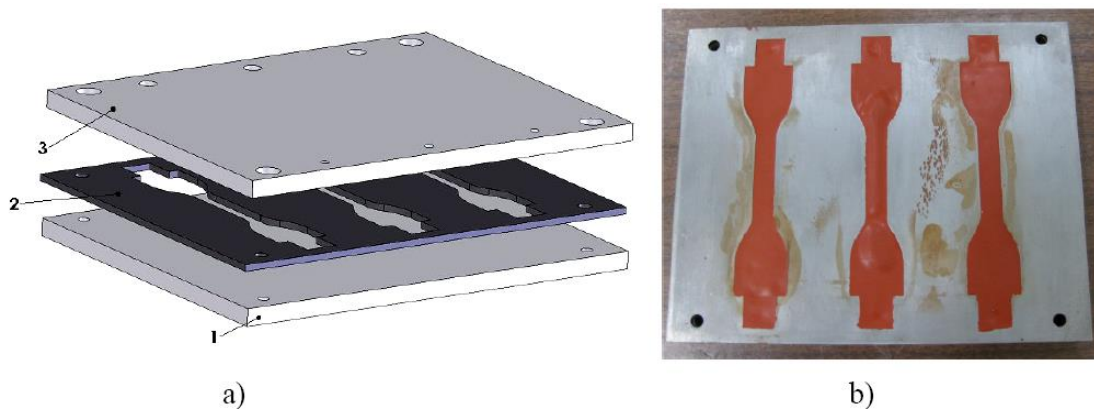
a) mould for producing bulk specimens. b) cured specimens in the mould
